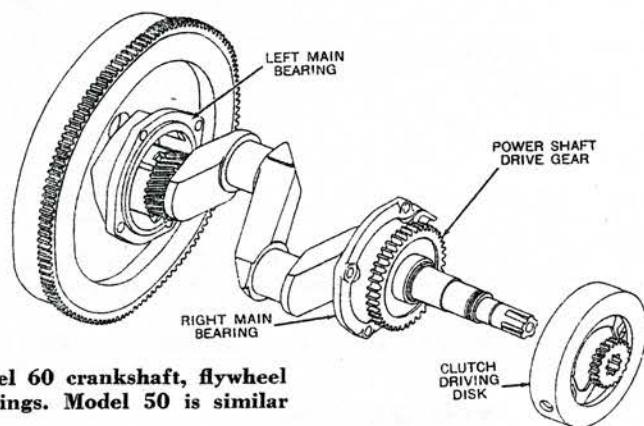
A Model 60 crankshaft, flywheel and main bearings. Model 50 is similar
